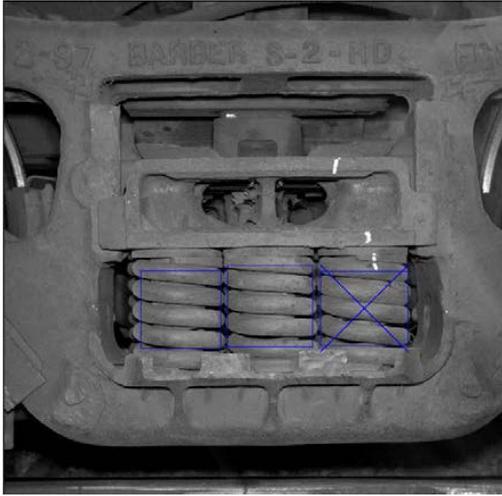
Spring condition, load balance, wedge condition, end cap bolts, and bearing adapters are diagnosed.
